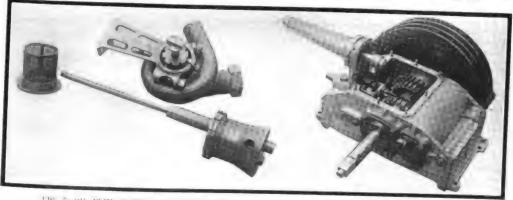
OIL PUMP FILTER AND WATER PUMP
